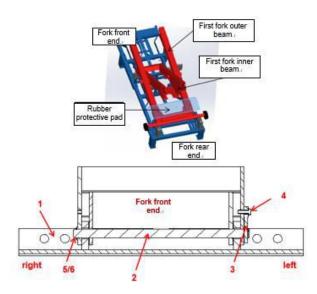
Installation of lower mounting plate 1. Mounting plate assembly 2. Pin 3. Safety pin
